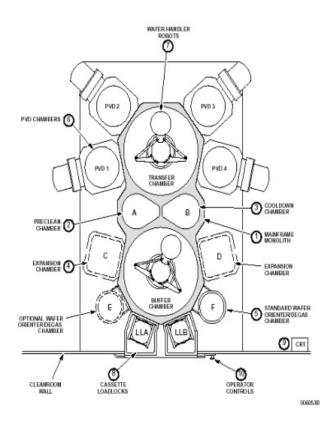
Chamber Configuration of the Metal Deposition Machine
